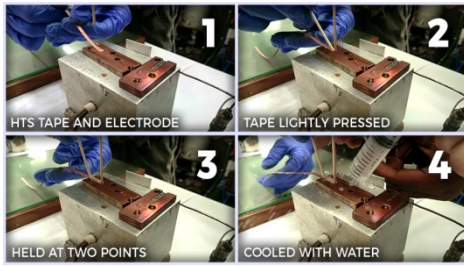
Step-by-step soldering method process for soldering HTS tapes to copper electrodes.
